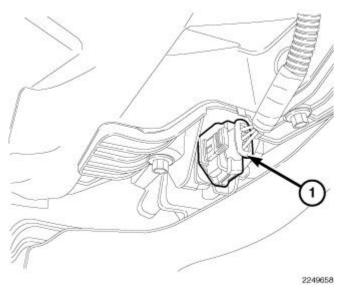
Crankshaft Position Sensor (CKP) Access Cover
